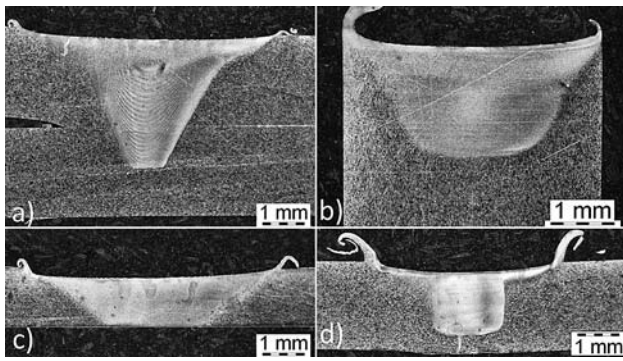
FSW weld macrostructure of a) lap joint (tool B, RPF = 20,4 rev/mm, 93 mm/min, 3°), b) butt joint (tool D, RPF = 135,7 rev/mm, 14 mm/min, 5°), c) butt joint (tool C, RPF = 20,4 rev/mm, 93 mm/min, 3°) and d) butt joint (tool D, RPF = 135,7 rev/mm, 14 mm/min, 5°)
